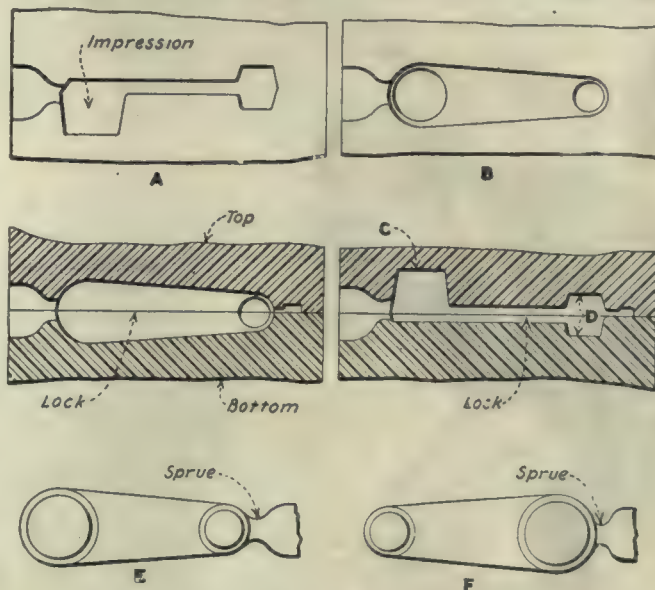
POINTS IN DESIGN OF FORGING DIES
